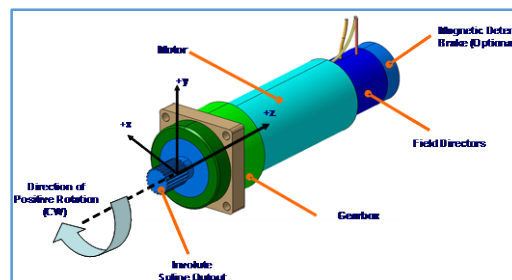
JWST Deployment Brushless DC Geared Motor Overview
